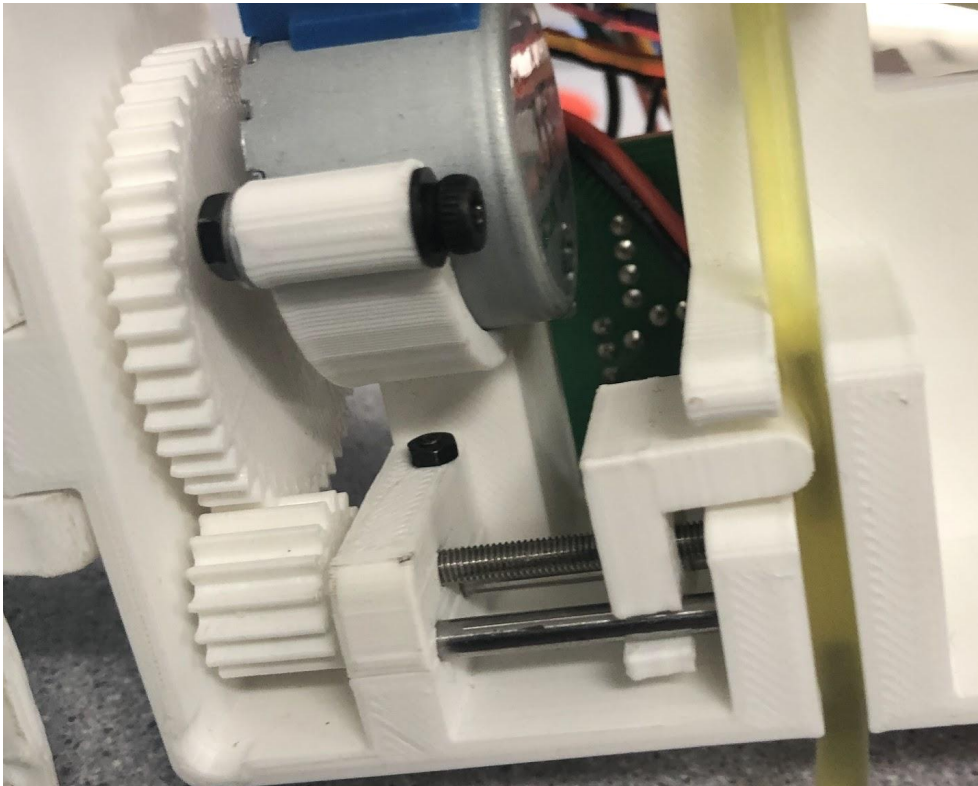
Design 2 iteration assembled consisting a 1:3 gear ratio (screw mechanism powered by stepper motor)
